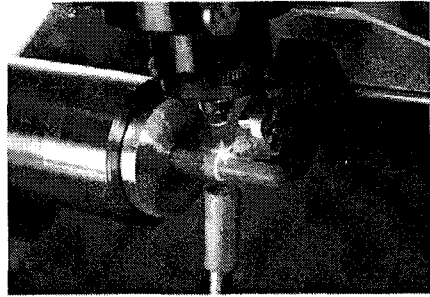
Laser assisted machining of ceramic (Purdue Univ.)
